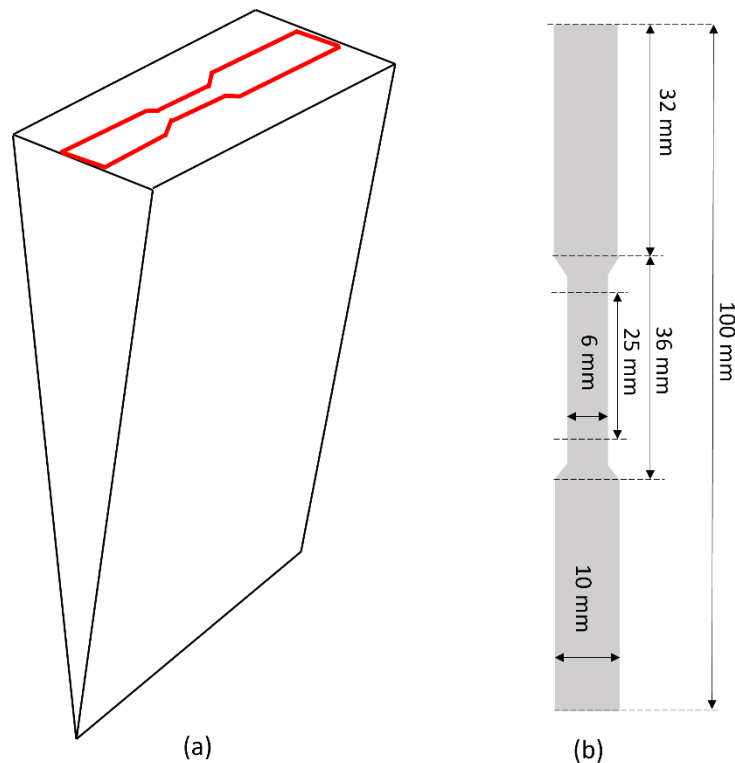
Illustration of wedge mould casting, showing (a) the area of extraction of tensile specimen (b) dimensions of the ASTM E8 subsized samples.
